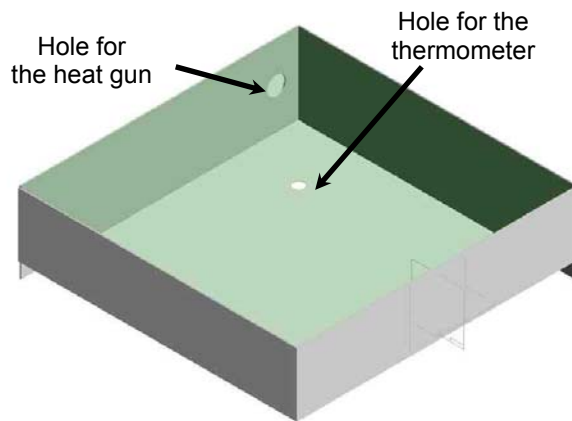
CAD model of the housing unit for the SMPs.
